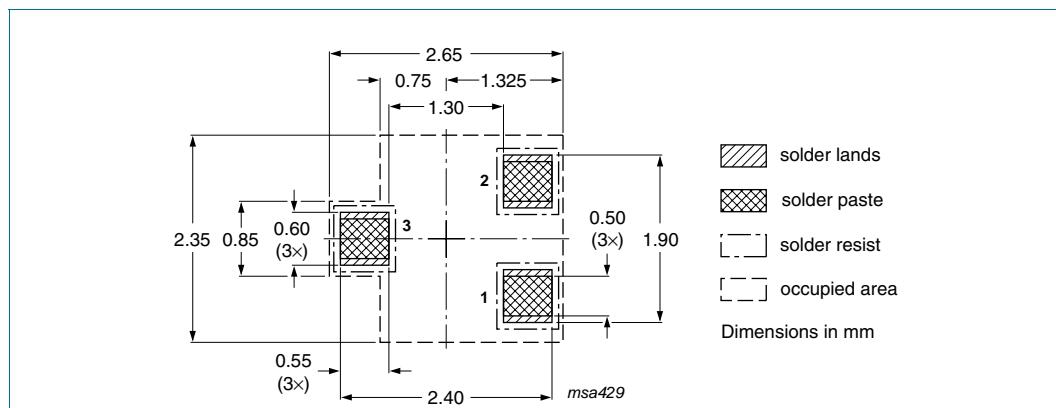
Reflow soldering footprint SOT323 (SC-70)
